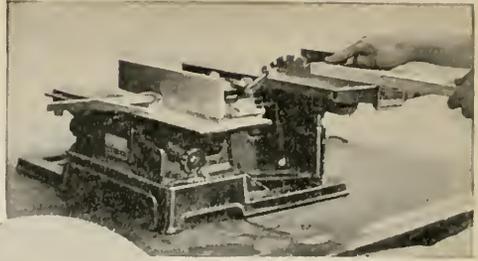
(above).—Ripping stock to width, the guard being removed for clearness.
